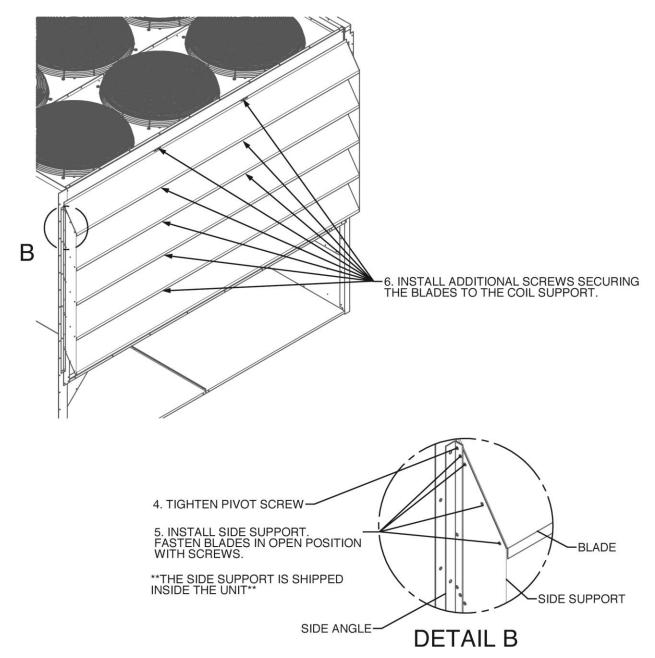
90-140 ton Condenser Coil Guard Installation Instructions 2
